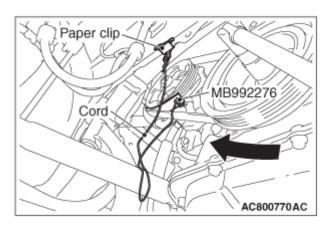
Turning Crankshaft Pulley Clockwise Until Special Tool MB992276 Is Pinched And Held Between Oil Pump Assembly Pulley
